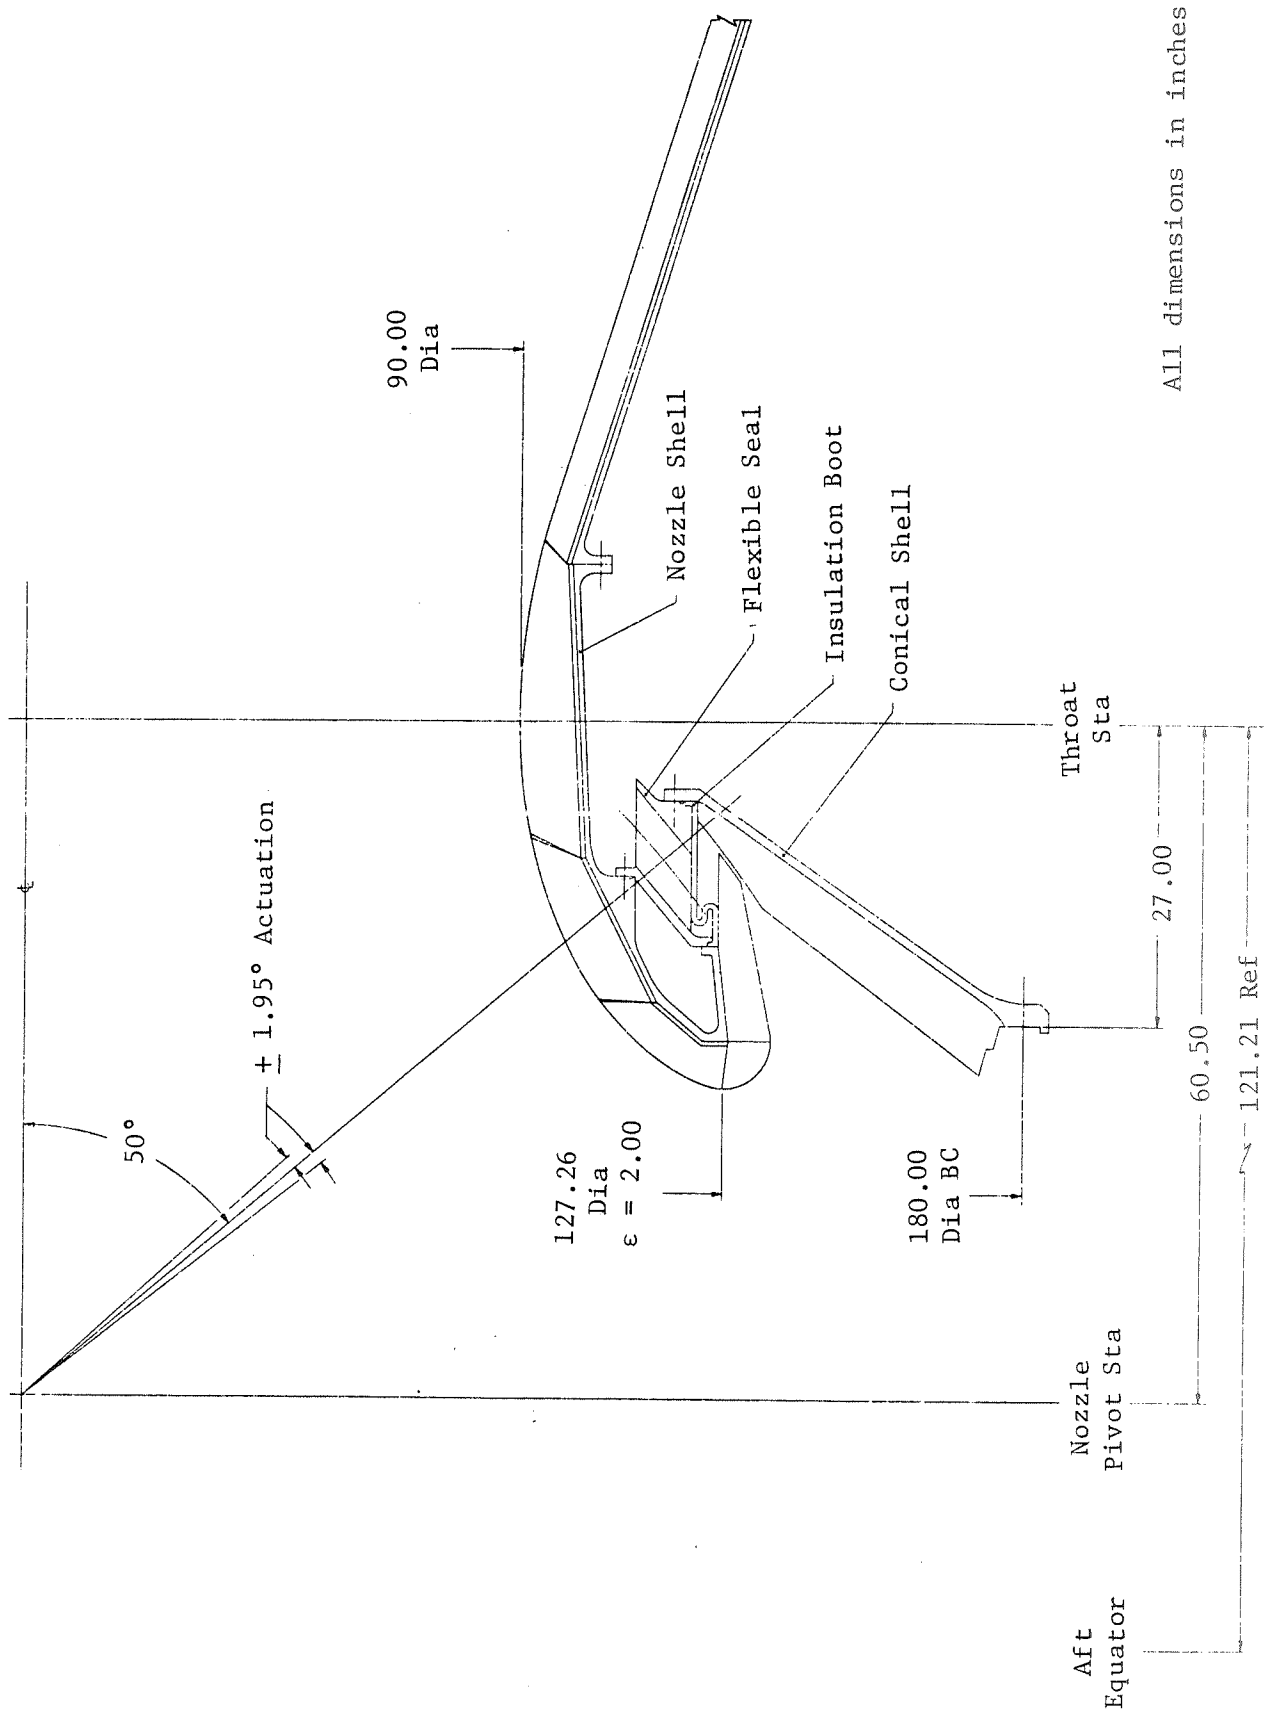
Nozzle Design with Forward Pivot Flexible Seal
